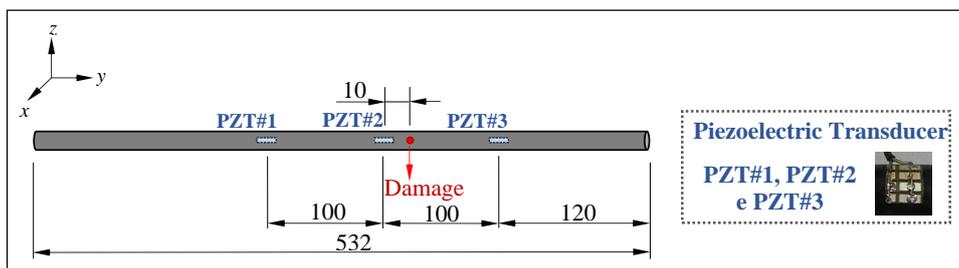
Positioning of piezoelectric transducers and shaft damage.
